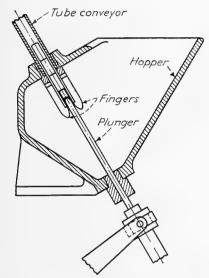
Hopper used for feeding shell-like pieces into a tube conveyer. A reciprocating plunger picks up the work at the lower end of the stroke and deposits it in snap fingers at the end of the conveyer tube.
